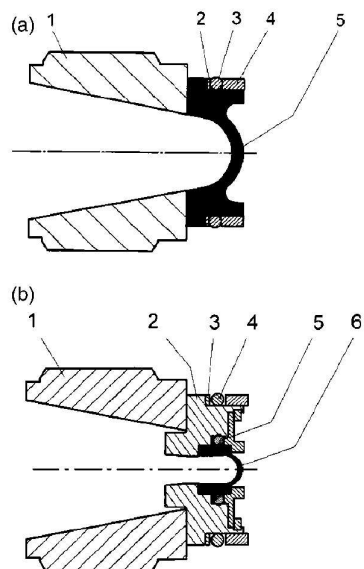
(a) Drawing of the assembly of a beryllium HP window. (1) Locknut to hold tight the windows in the HP vessel orifice. (2) Antiextrusion Teflon ring. (3) Viton O-ring gasket. (4) centering brass ring. (5) beryllium window. (b) Drawing of the assembly of a sapphire HP window. (1) Locknut to hold tight the windows in the HP vessel orifice. (2) Adaptation element. (3) Antiextrusion Teflon ring. (4+5) Viton O-ring gaskets. (6) Sapphire window.
